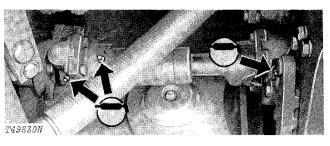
Lower Telescoping Universal Joints (3 Points)
